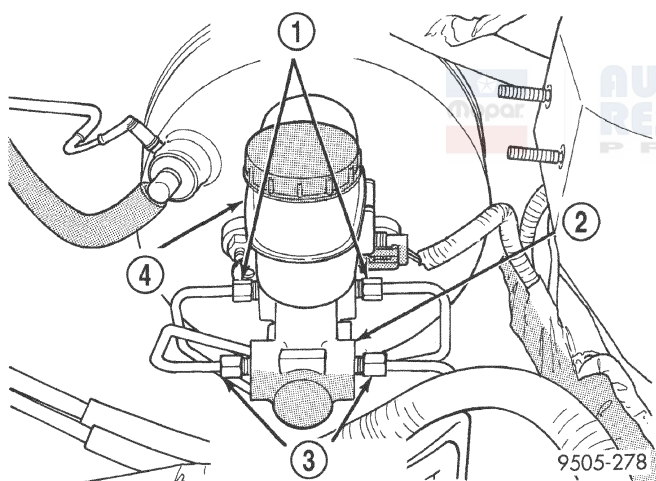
Master Cylinder Primary And Secondary Ports With ABS
